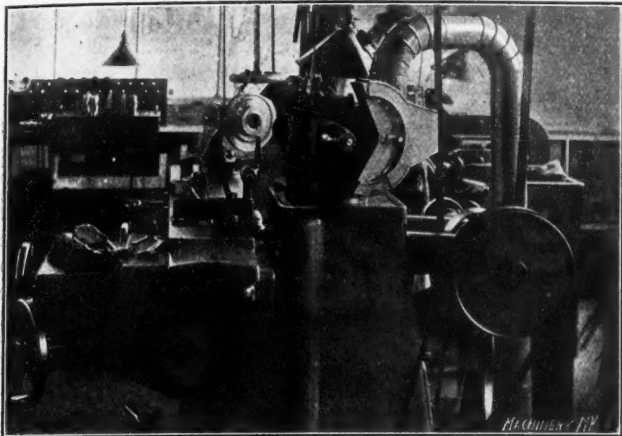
Dusthood and Exhaust Pipe on a Swivel-head Grinder
